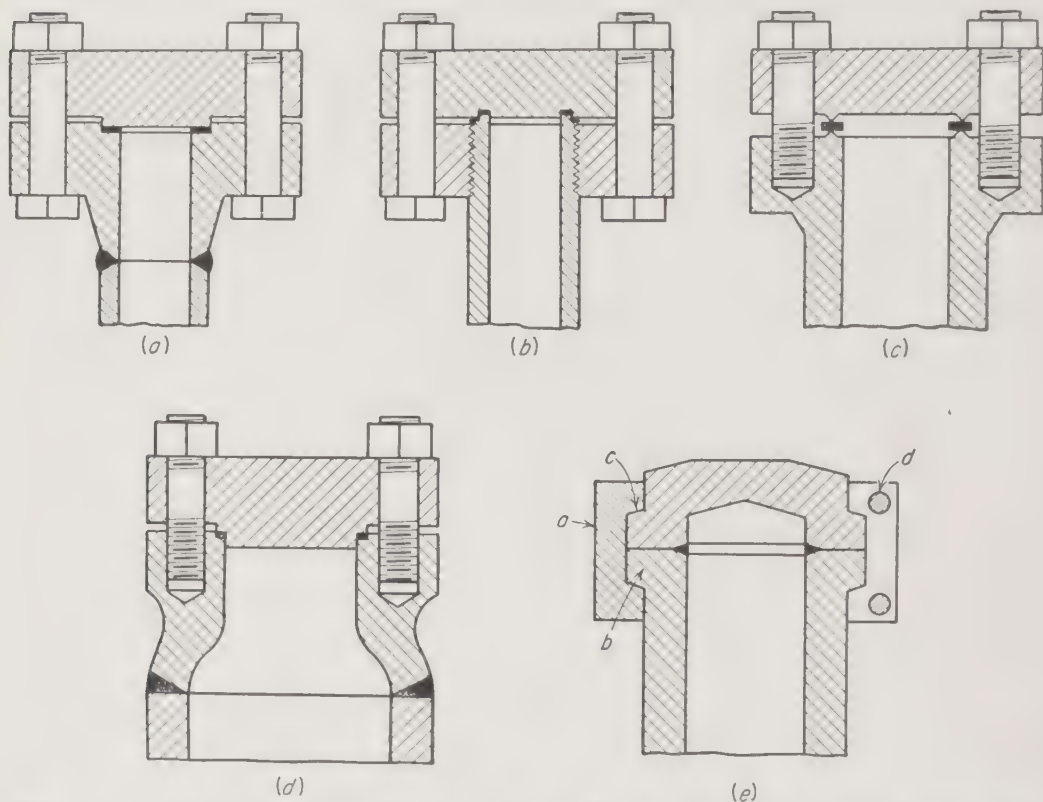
Flanged closures. [From D. Meigs, *Trans. Am. Inst. Chem. Engrs.*, 39: 769 (1943).] (a) Bolted flange, welded. (b) Bolted flange, screwed. (c) Ipatieff closure. (d) Flange neck, welded. (e) Vickers-Anderson joint.
